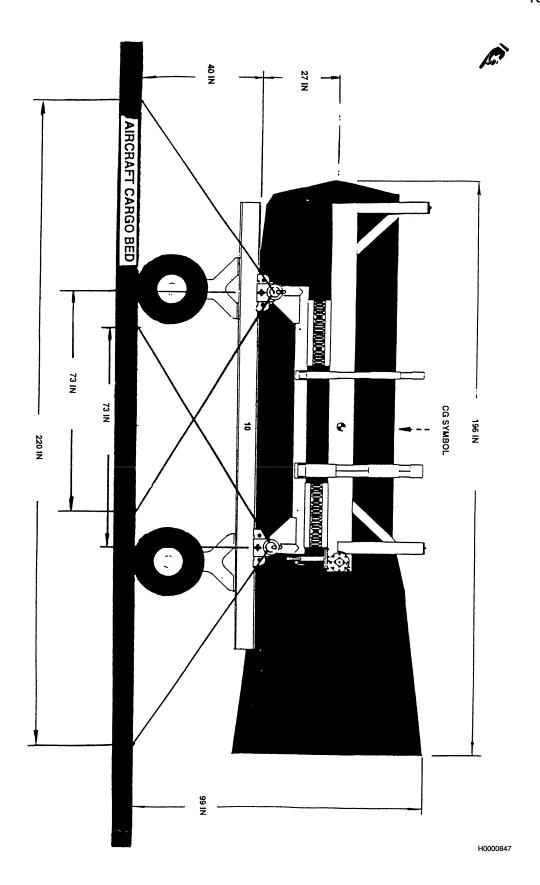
F119/ESS/3000E Overall Dimensions and Cargo Aircraft Tiedown Configuration - Side View
